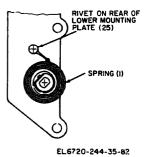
Spring location (spring (1) from fig. 3-9).
